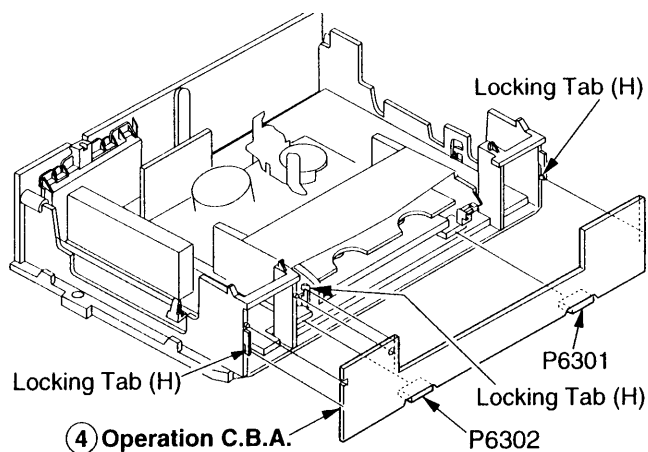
Operation Circuit Board (Model VR692HF) Removal
